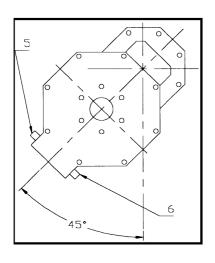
Inspection / filling plug and drain plug of the rear axle.
